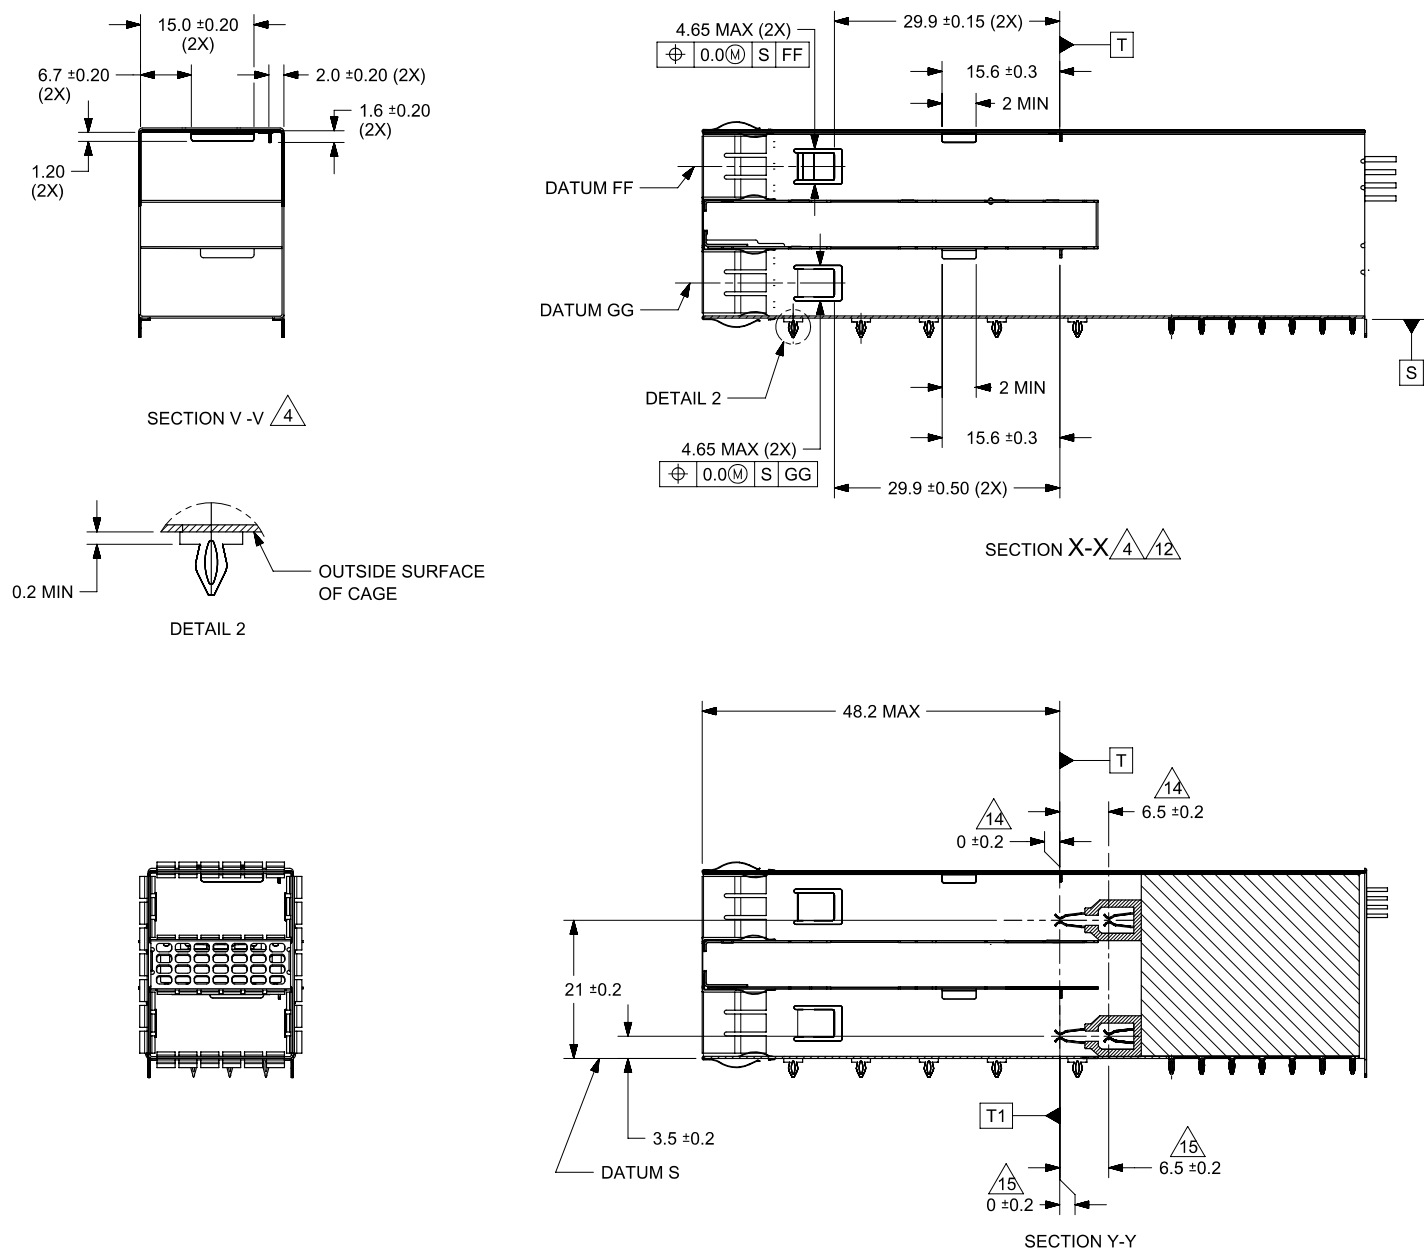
2x1 Cabled over SMT connector and cage – Side View
